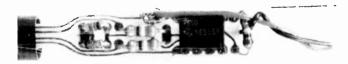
COMPONENT LAYOUT shows approximate positioning of the parts on the PC board.
